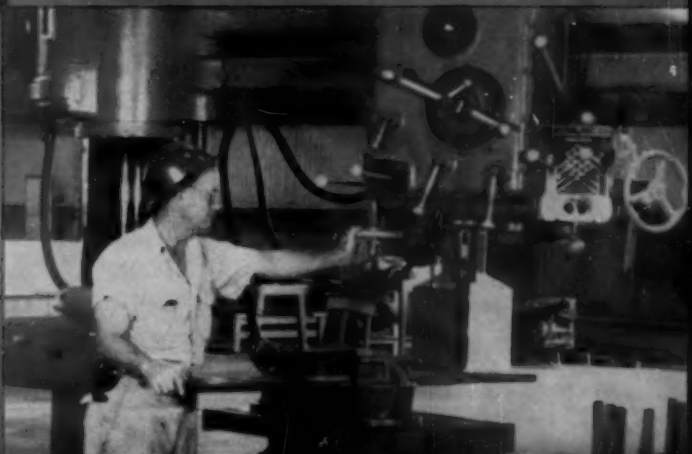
Beige grinder eye shields are shown in sharp contrast to olive body of machine.
